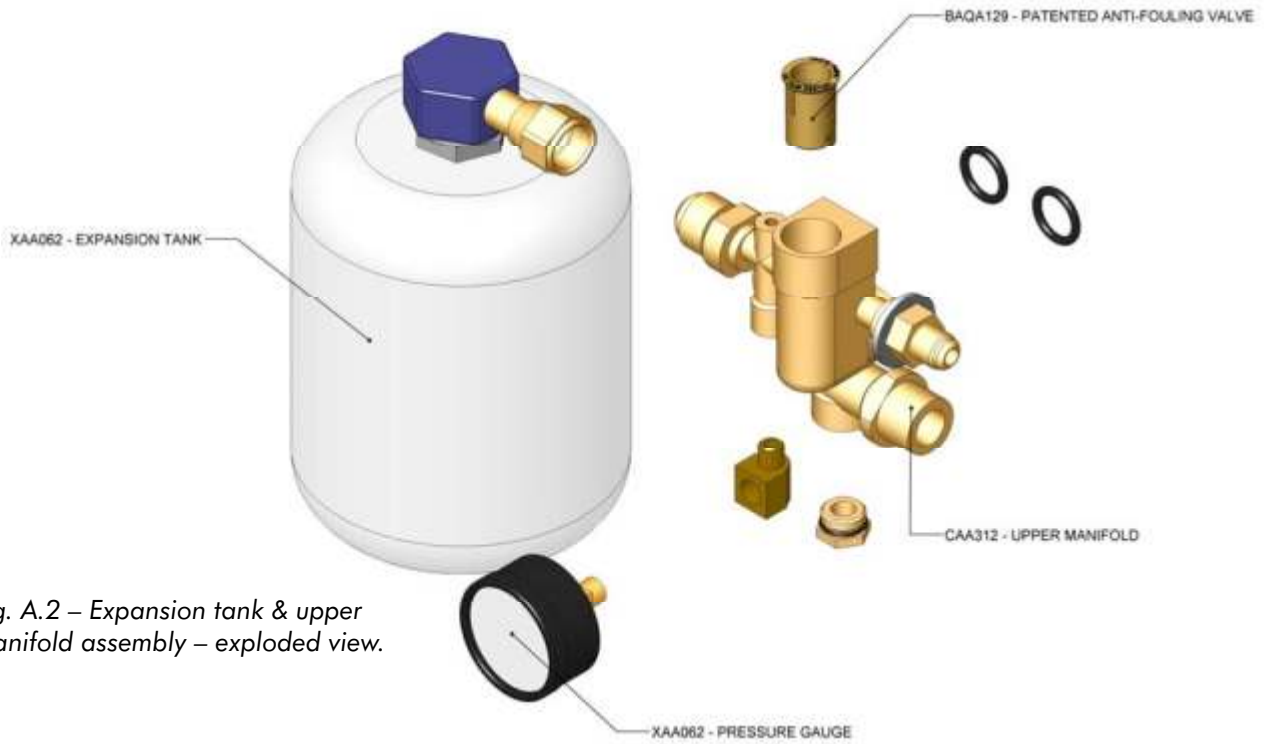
Expansion tank & upper manifold assembly – exploded view.
